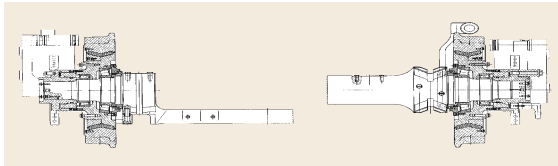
Idle wheels with cranked axle for low-floor tram Schwerin with rubber-cushioned individual turning wheels of type B02000, wheel diameter new 600 mm, gauge 1435 mm, weight 897 kg, with bearings and brake system, wheel stiffness 200 kN/mm radial and 20 kN/mm axial (Bochumer Verein, BVV, Bochum)
